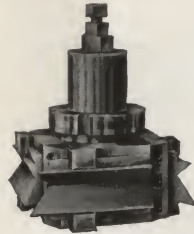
Philbrick 4-knife Universal Moulding Head. This head is set to work the bevel on crown moulding and such patterns. The disc is removable from the self centering sleeve and can be used on all four spindles of the moulder. Other shapes of milled to pattern knives or corrugated steel ground to pattern may be used.
